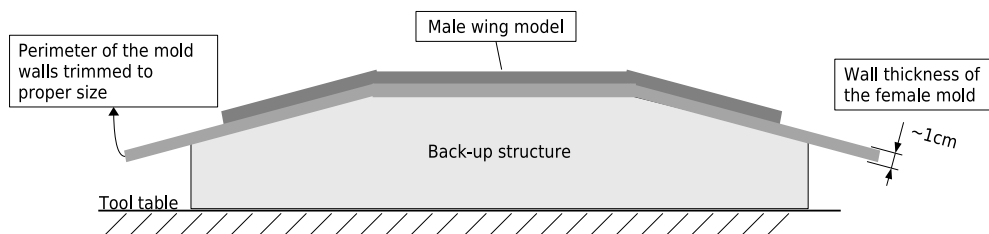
Front view of the mold assembly after it is turned upside down.
